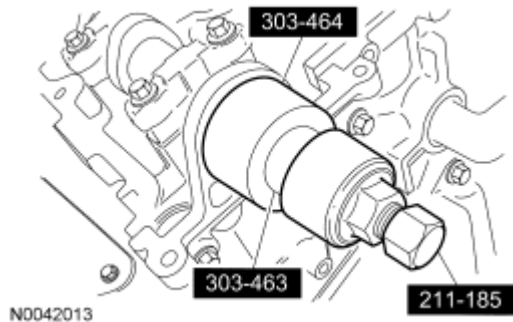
Identifying Special Tools (303-463, 303-464 And 211-185)
